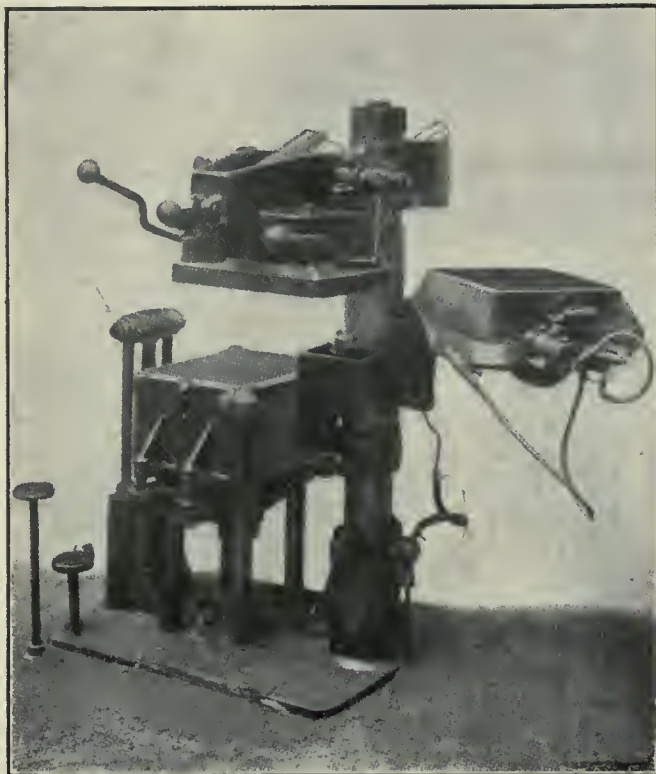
MACHINE IN POSITION FOR FILLING FLASKS.
